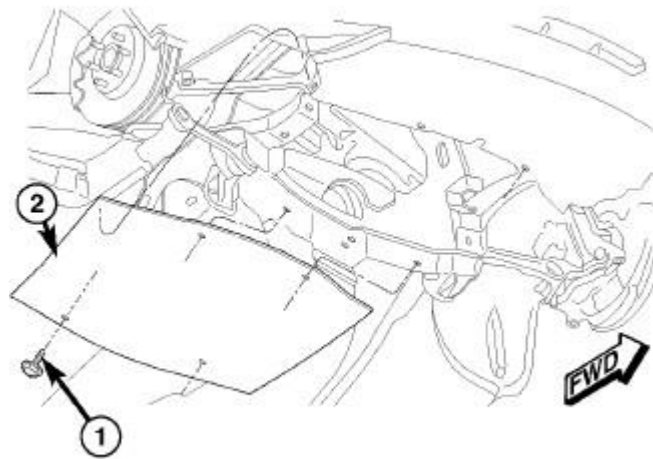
LEFT ENGINE MOUNT HEAT SHIELD
